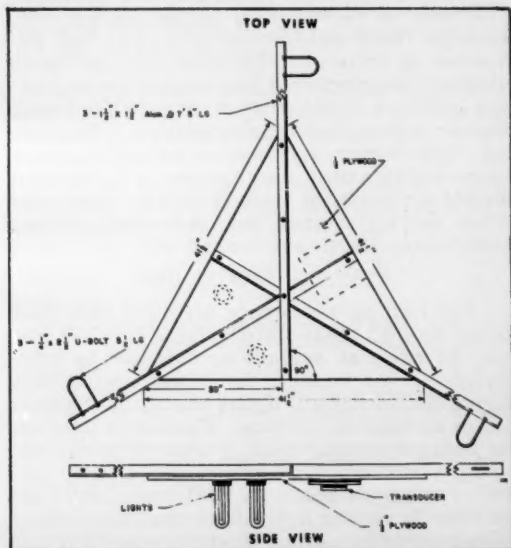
Design details of mounting platform used for positioning underwater lights and echo-sounder transducer over lift net.
